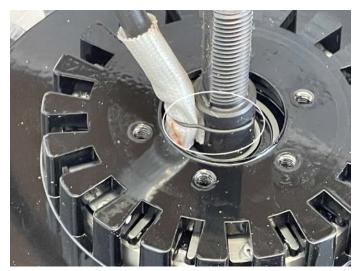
Location of motor cable attachment, in figure the clip version is shown.
